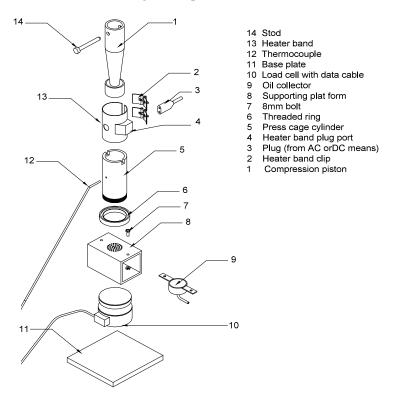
Exploded view of the Model laboratory Mechanical Oil Expression Rig
